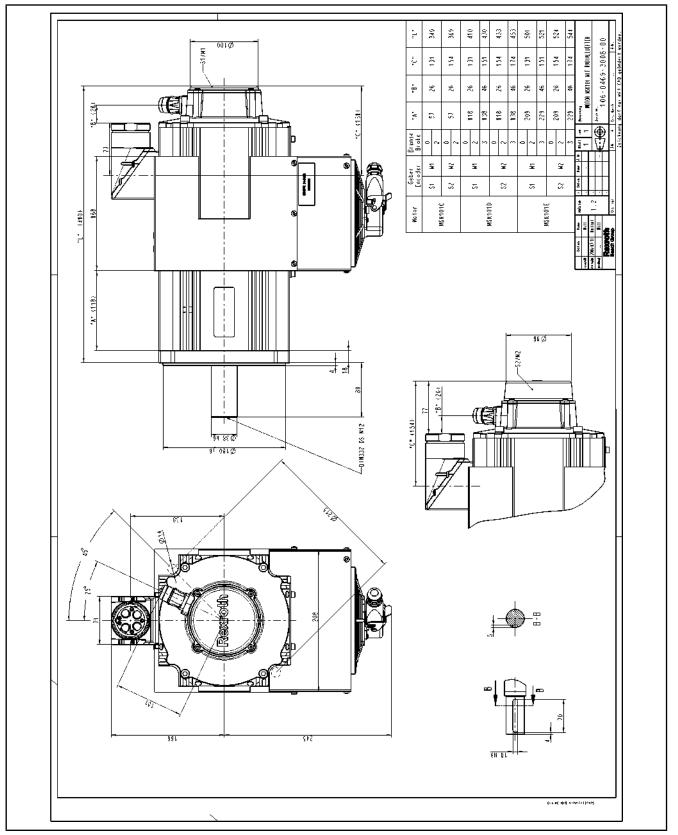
Dimension sheet MSK101 with radial fan unit
